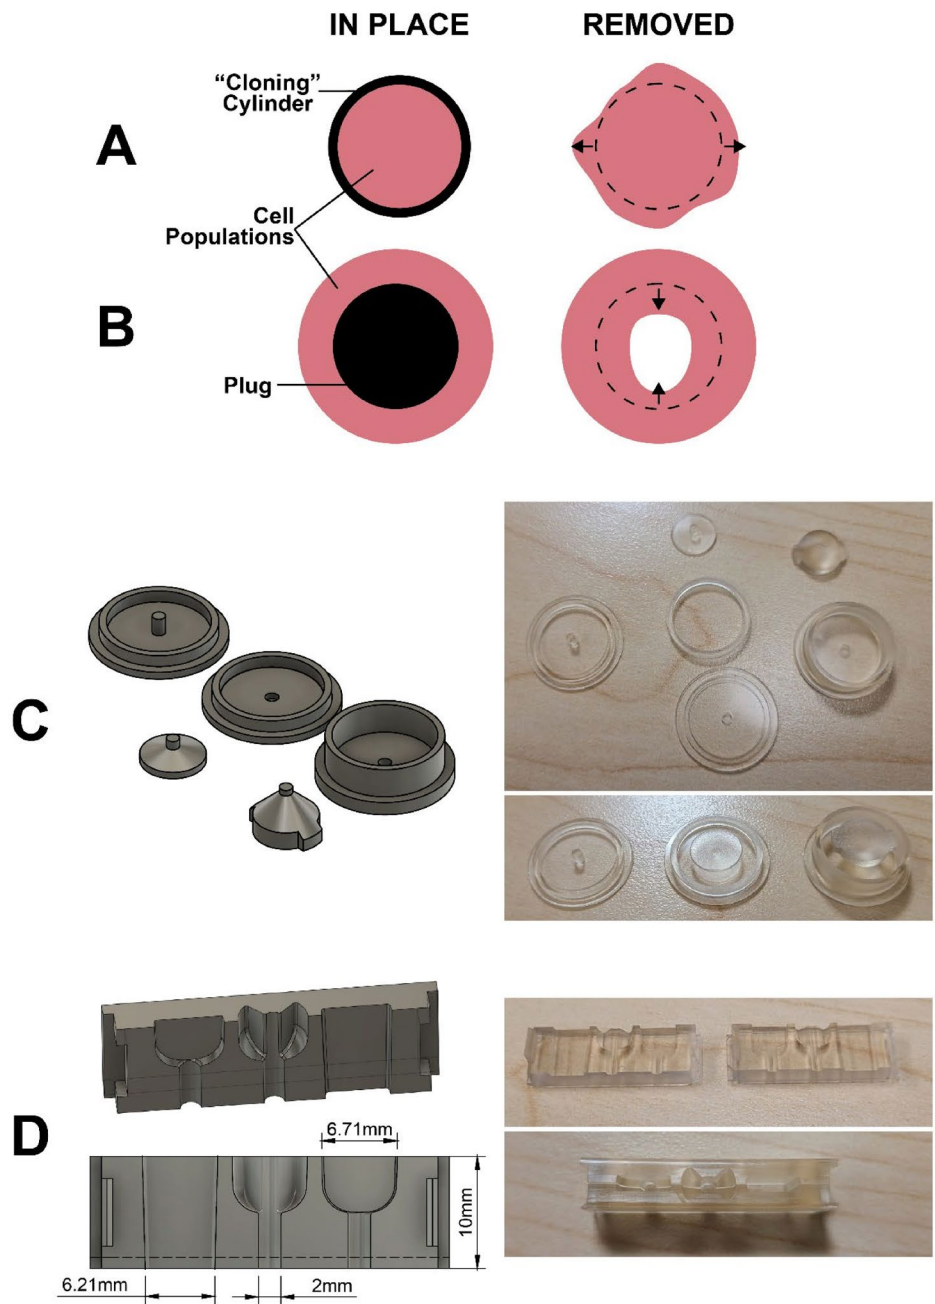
Design and fabrication of SLA-3D printed moulds.
